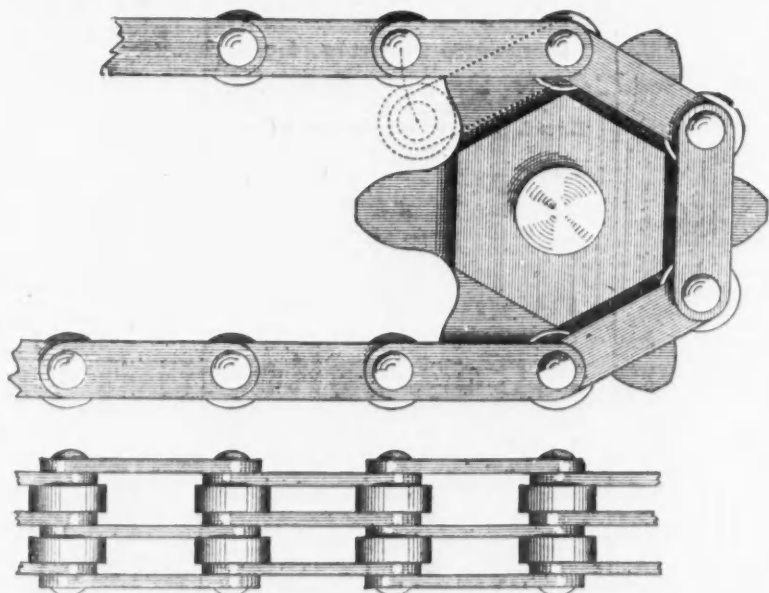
Detail of the Sprocket Wheel and Chain Employed to Drive the Cutter Bar.
